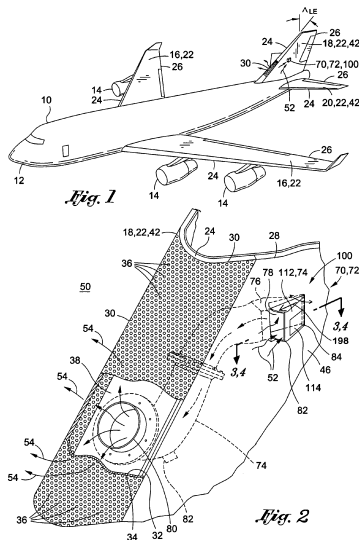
Patent drawing of door assembly for laminar flow control system [88].
